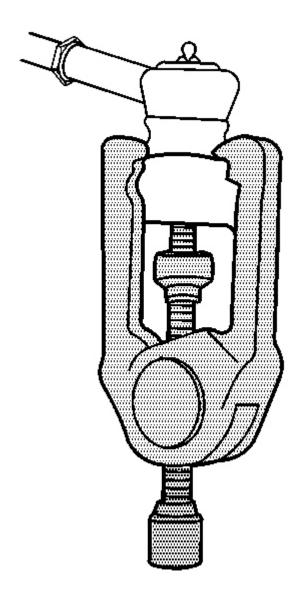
Removing Outer Tie Rod Assembly From Steering Knuckle Courtesy of GENERAL MOTORS CORP.
